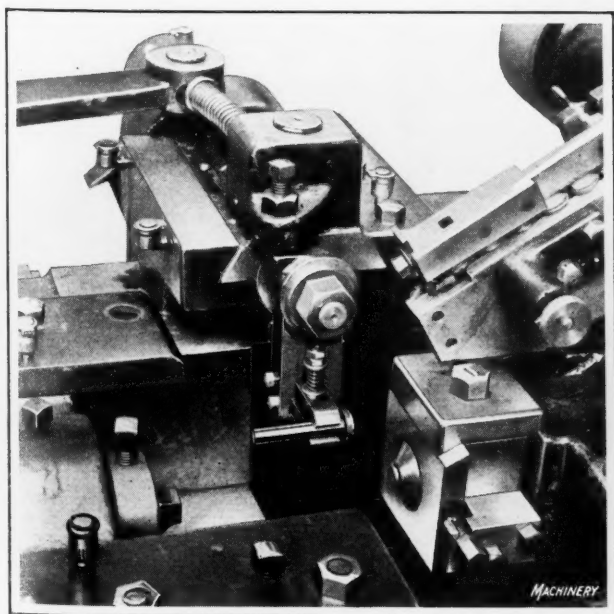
Mechanism which transfers the Blanks from the Chute to the Trimming Tools
